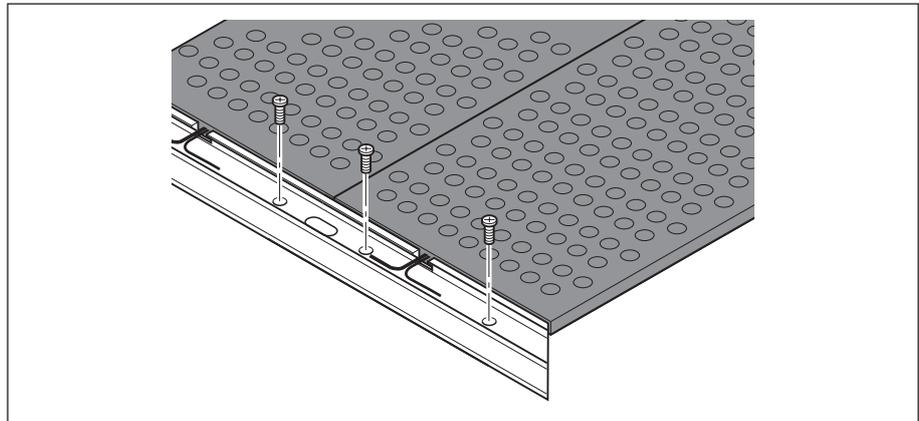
Fix lower sections of the ramp rails to the installation surface
